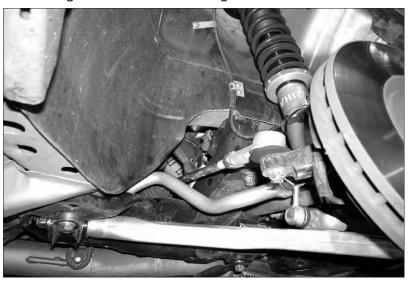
Note LHS, offset bushing installed for caster gain.
